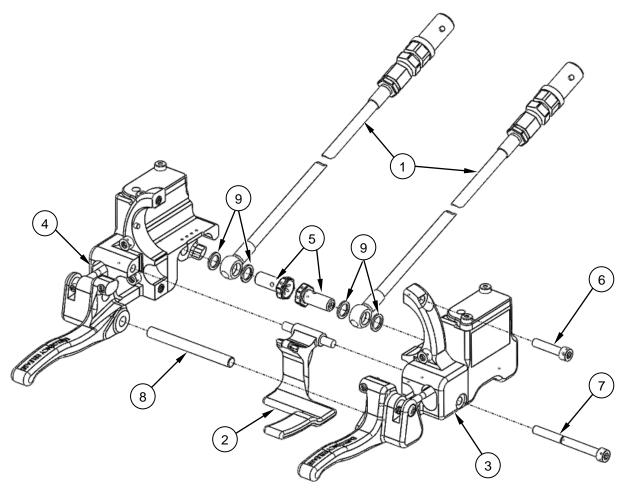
Dual Master Cylinder Assembly P/N 232-626-11
